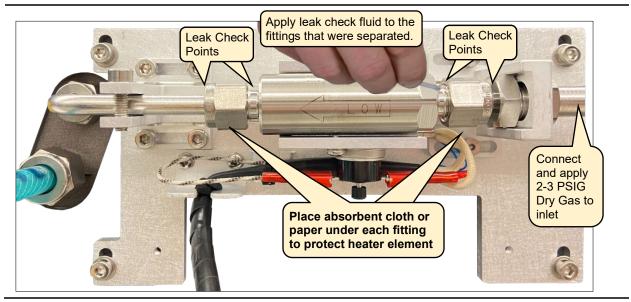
Leak Test After Reassembly – Externally Mounted Filter
